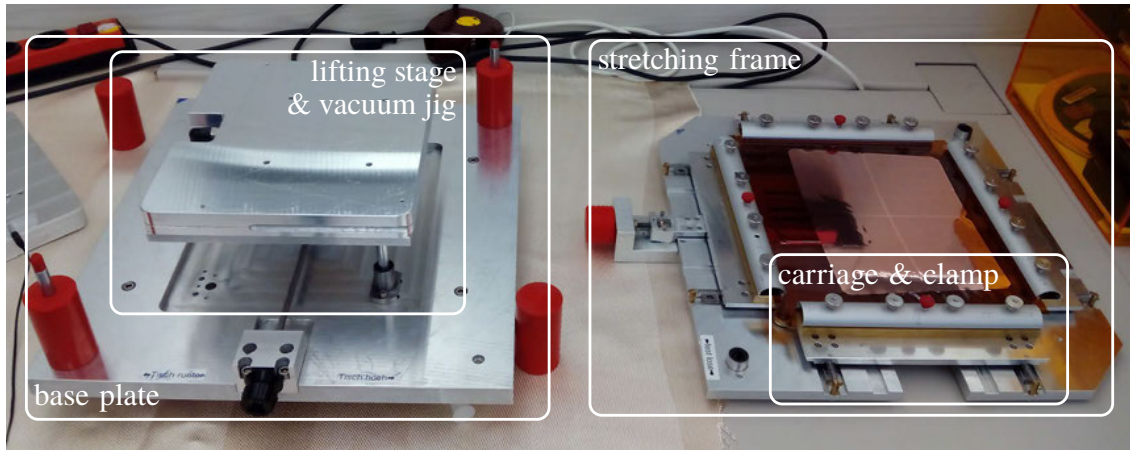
The GEM stretching and mounting tool used for the production of the new modules. The base on the left includes the lifting table with a vacuum jig to hold the ceramic frame. On the right is the GEM tensioning frame, which is detachable to access the lifting table.
